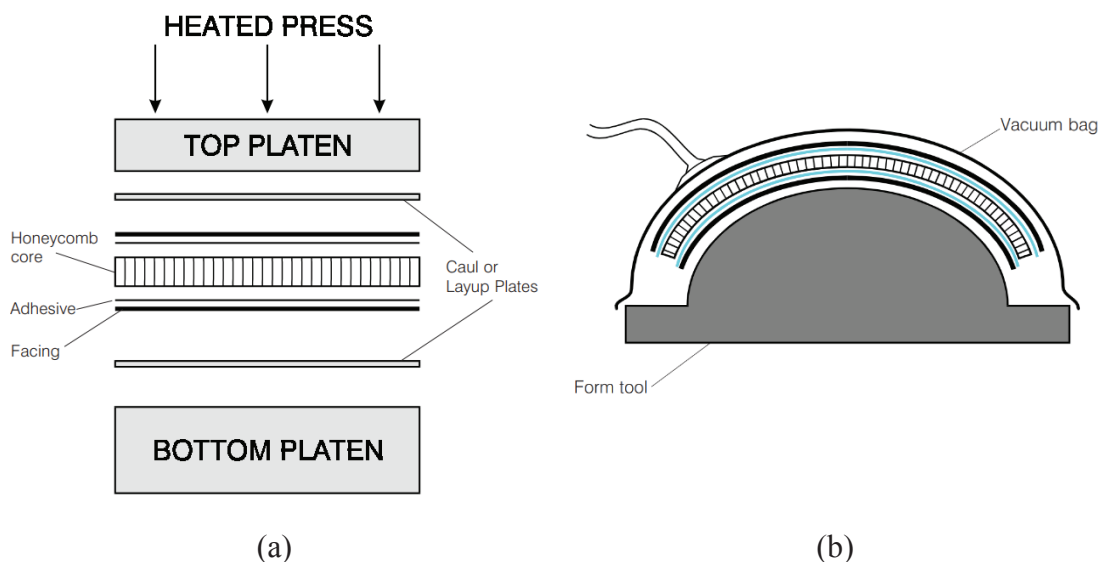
(a) heated Press¹⁰ and (b) vacuum Bag Processing¹⁰
